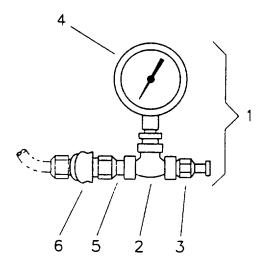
Halon Cylinder Adapter Assembly Repair
